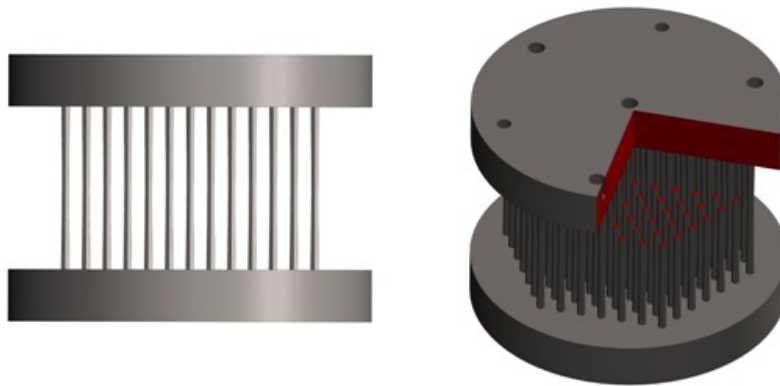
, left shows the dithering flexure along one of three identical cutting axes. Figure 13, right shows a sectional view of the flexure.
